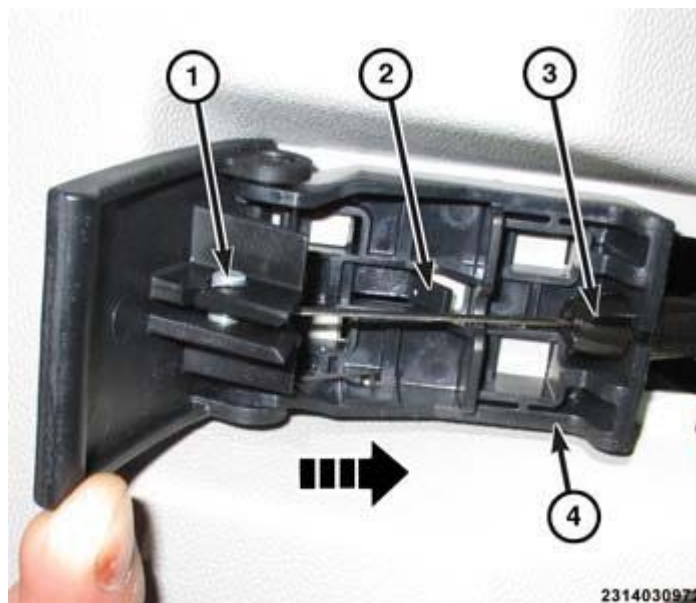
Retaining Tab, Hood Release Cable, Cable End & Handle
